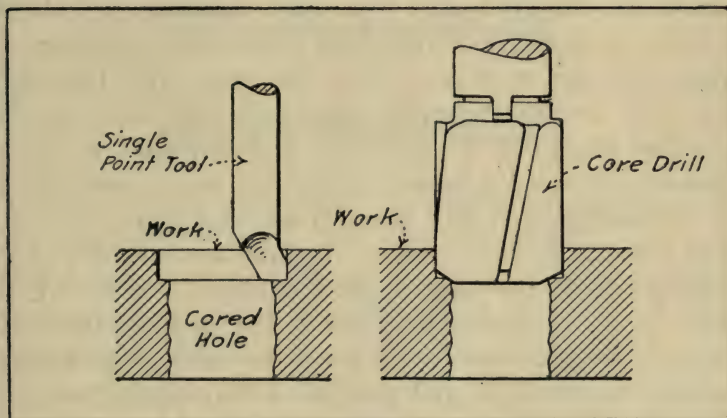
STARTING A HOLE WITH A STARTING TOOL PRIOR TO THE USE OF A CORE DRILL
